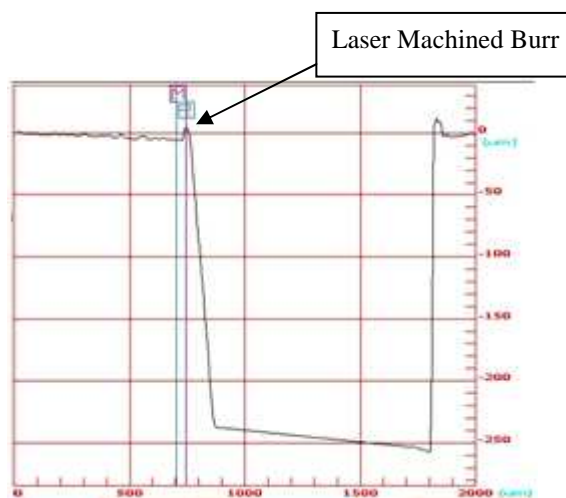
Surface profile scan of a 15 μ m laser machined burr
